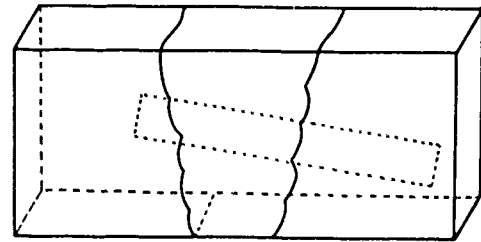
Schematic representation of testpiece geometry and position of the weld interface along the gauge length.
